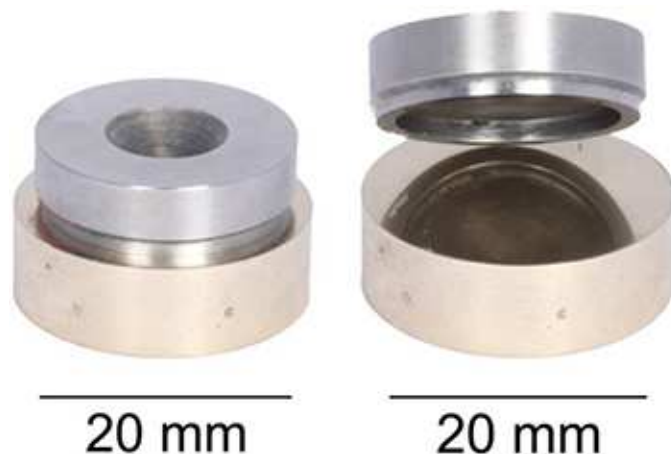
Test Geometry and Contact Position (right) of the Upper Steel Disk Specimen and Lower Brass Disk Specimen
